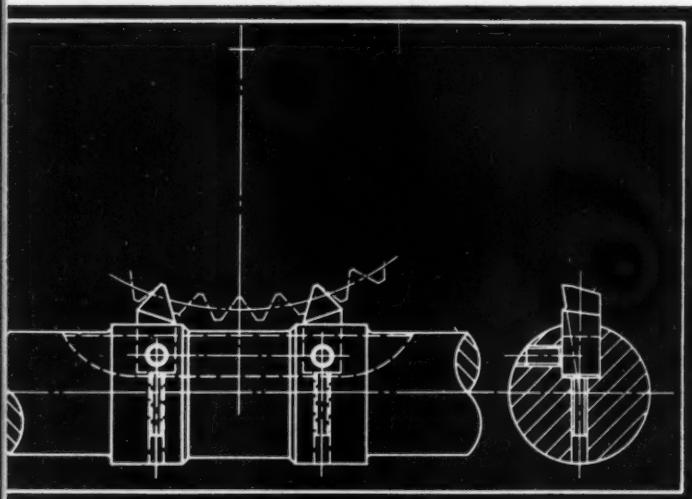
Proposed style of hob for cutting modified gear uses only end teeth, which generate the full modification
